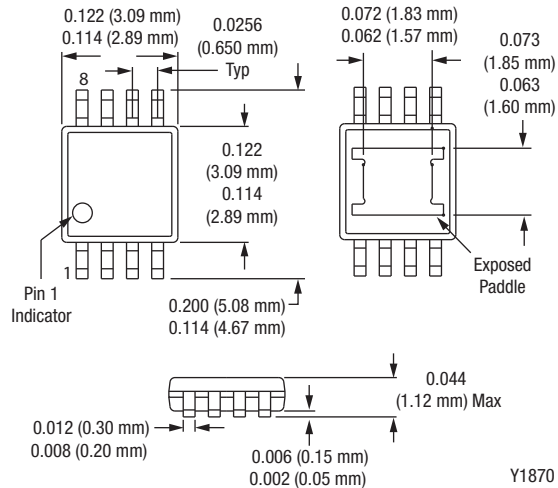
MSOP-8 Exposed Pad Package Dimension Drawing
